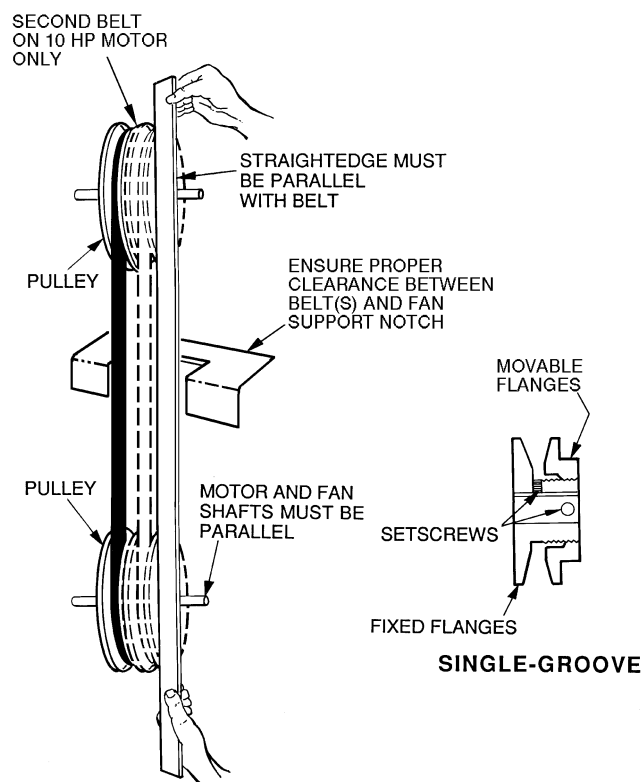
Evaporator-Fan Pulley and Adjustment
